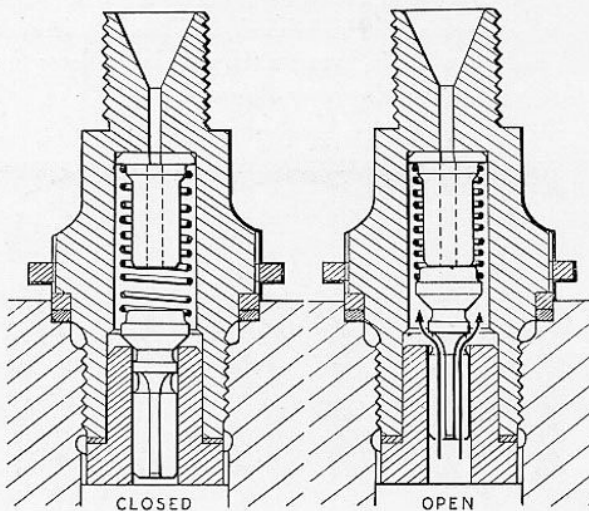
SECTIONED VIEWS OF DELIVERY VALVE
